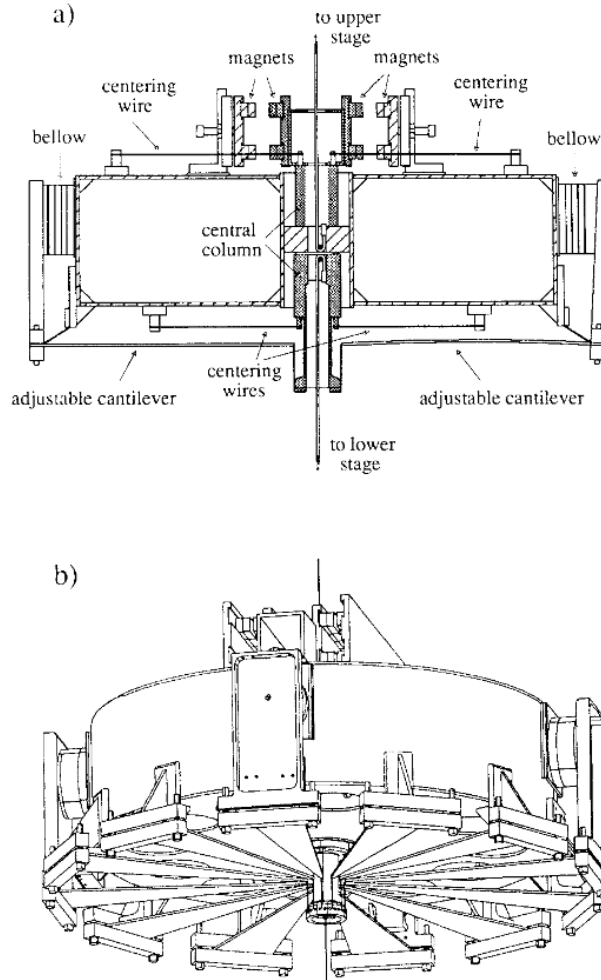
Structure of the mechanical filter used in VIRGO super attenuator, side view and perspective view. The figure is retrieved from [14].
